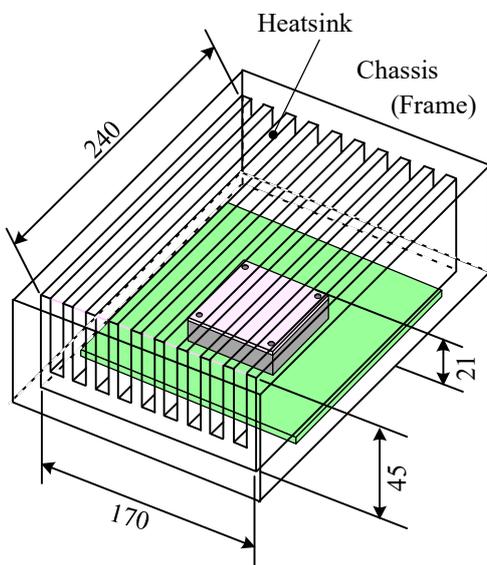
Large Heatsink Configuration (Perspective View)
